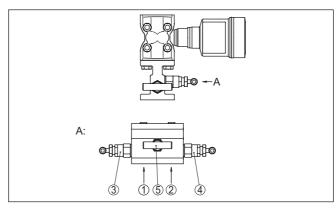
Connection of a 3-fold valve block, flanging on both sides
